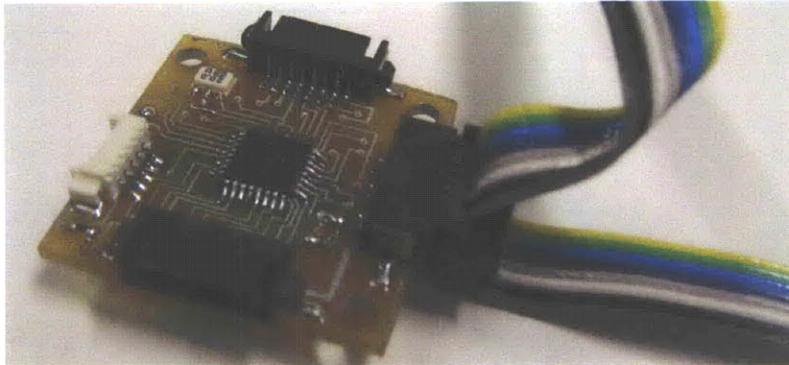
The motor control board for *MCB Mini V2*. Figure shows how boards connect simply to a bus that provides data and power.
